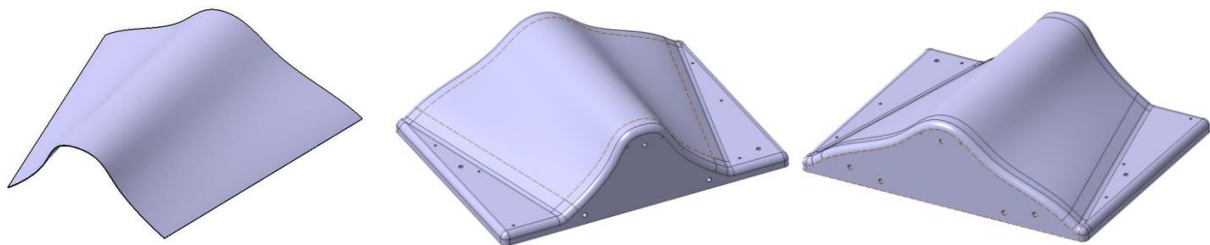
Basic shape of the Canopy geometry and CAD model Iso view of the mould tool.
